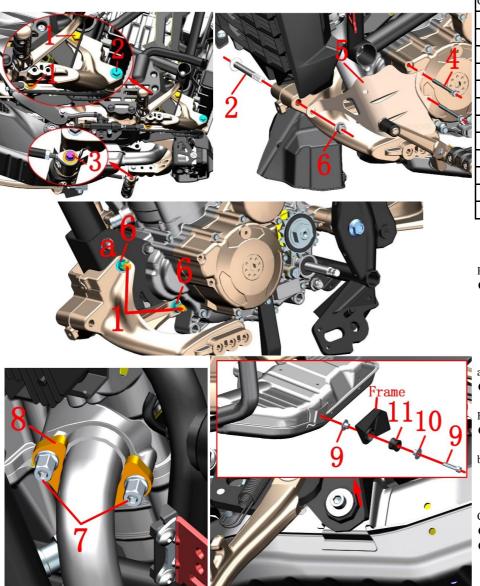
M	UFFLER	Muffler component 2	CHK	(0)
